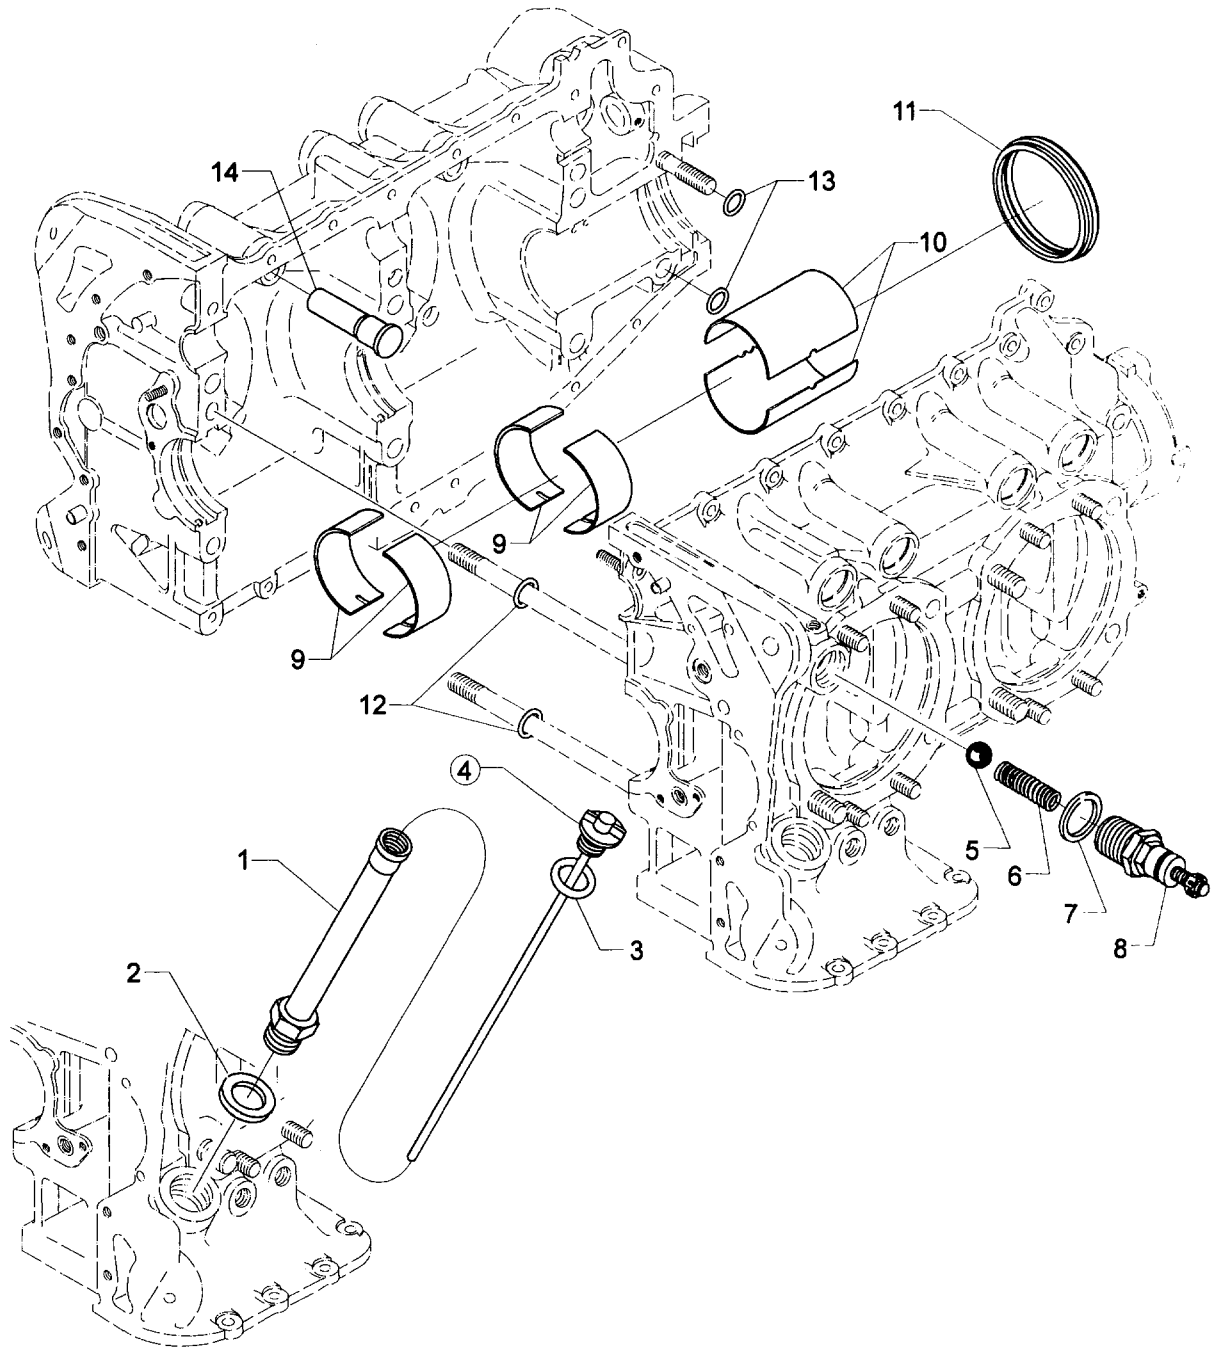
OIL LEVEL GAGE ASSEMBLY AND CRANKCASE RELATED PARTS
